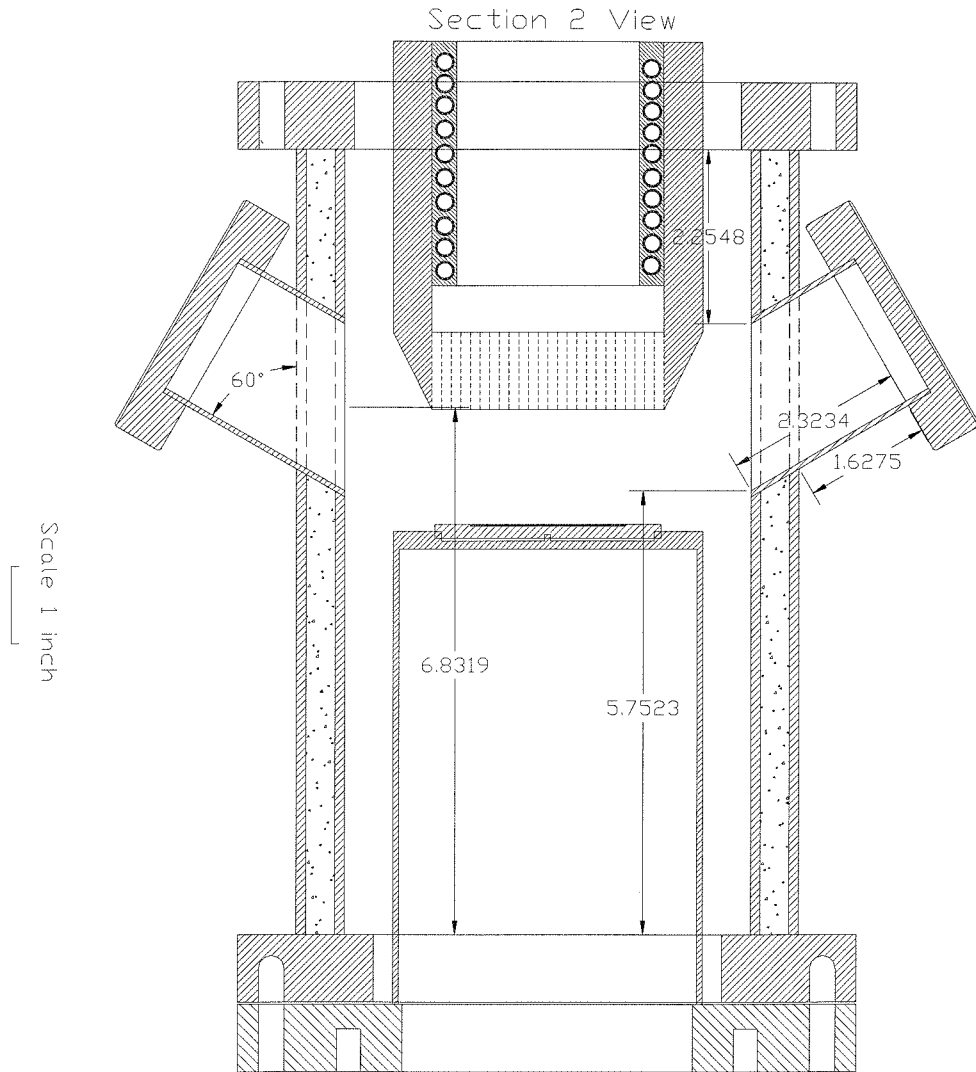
Cross-sectional view through the angled viewports of the chamber body, inconel can, and copper portion of the showerhead.
